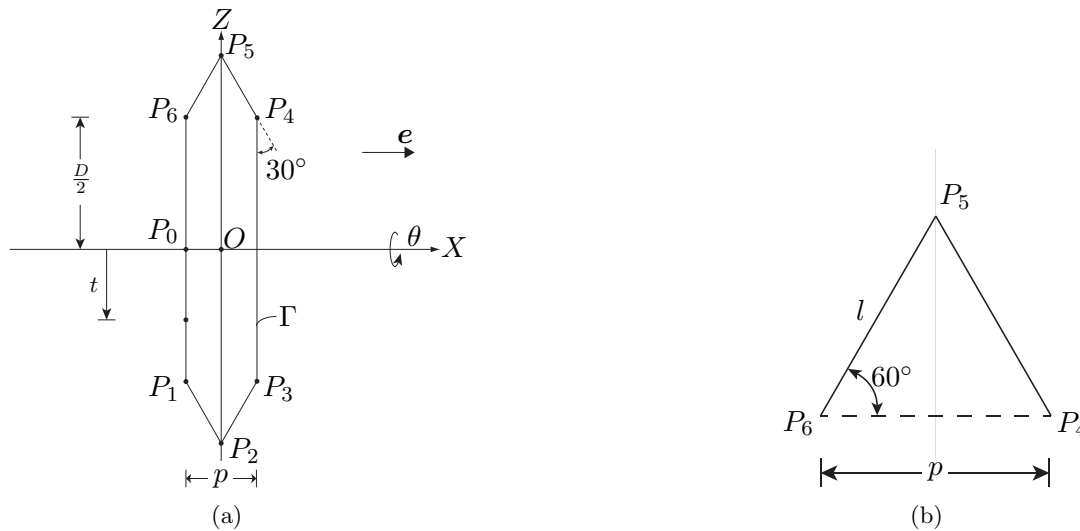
The generatrix Γ for the construction of the threaded surface of a screw: (a) general layout; (b) detail of the vee-shaped parts
